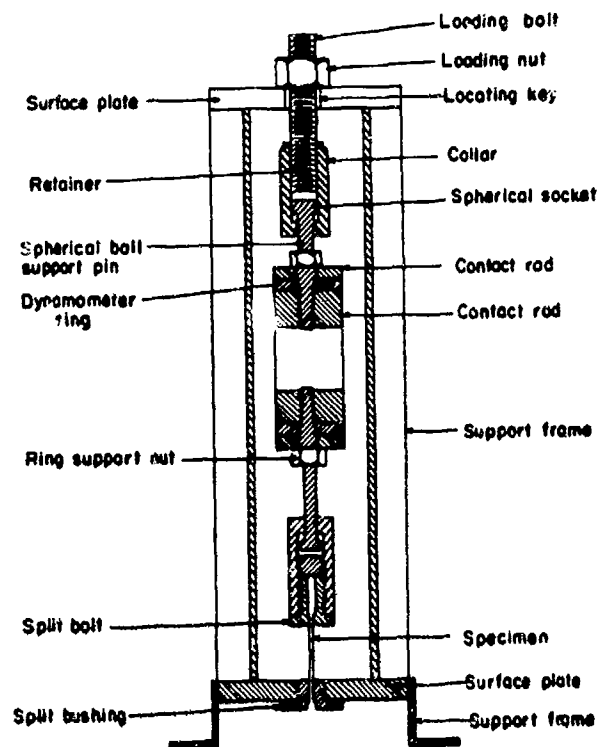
Cutaway view of static tension jig showing loading nut and bolt. To prevent eccentric loading of the specimens, all flat loading-surfaces were faced-off normal to the channel supports within $\pm 1^\circ$, all holes were line drilled on center-line within ± 0.01 in. and perpendicular to the surface plates within $\pm 1^\circ$.
